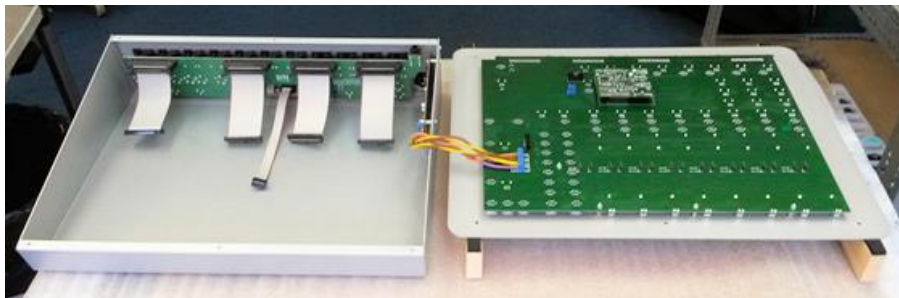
Airlite disassembled for placing the optional AES output board and or USB board
